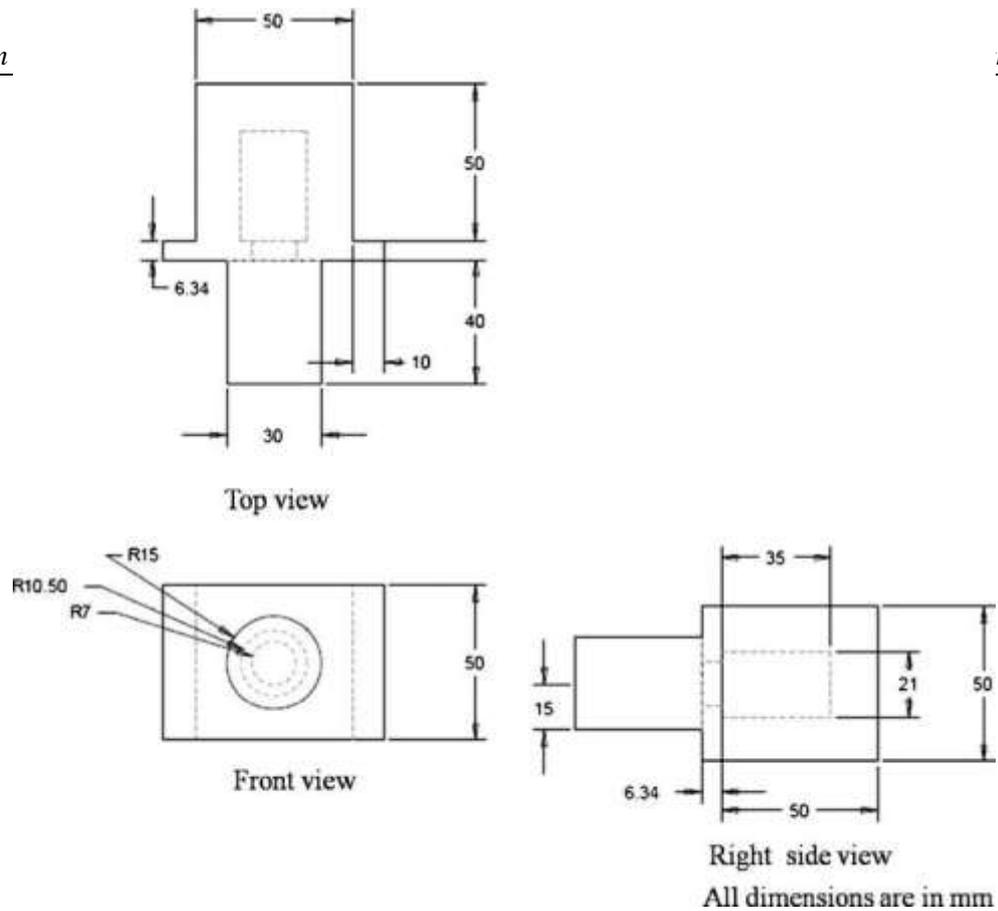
2D views pertaining to workpiece and tool used in FWTPET process
